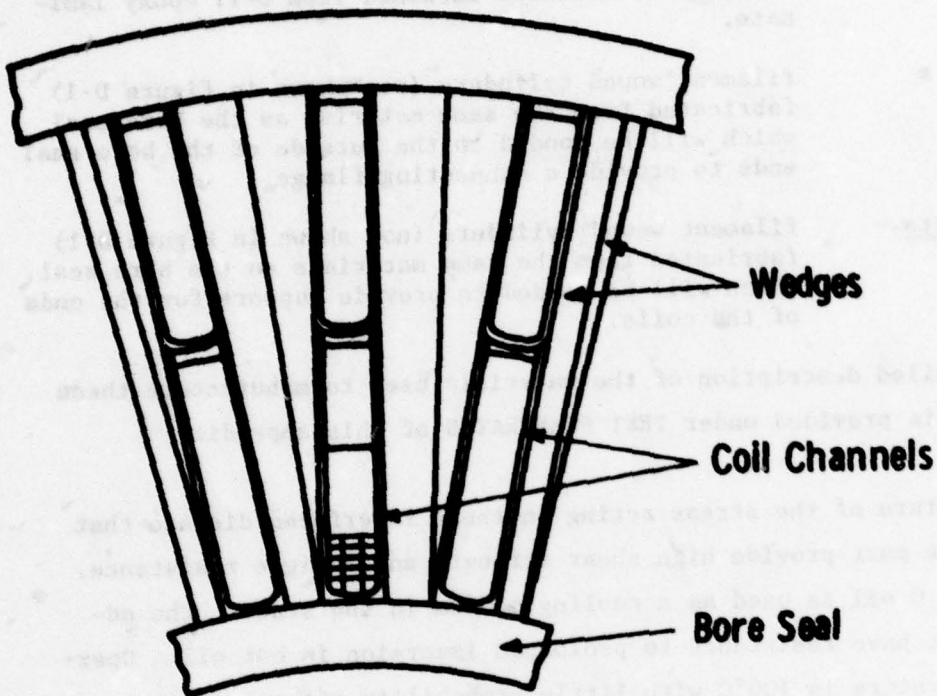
END VIEW OF STATOR SECTION SHOWING WEDGE,
